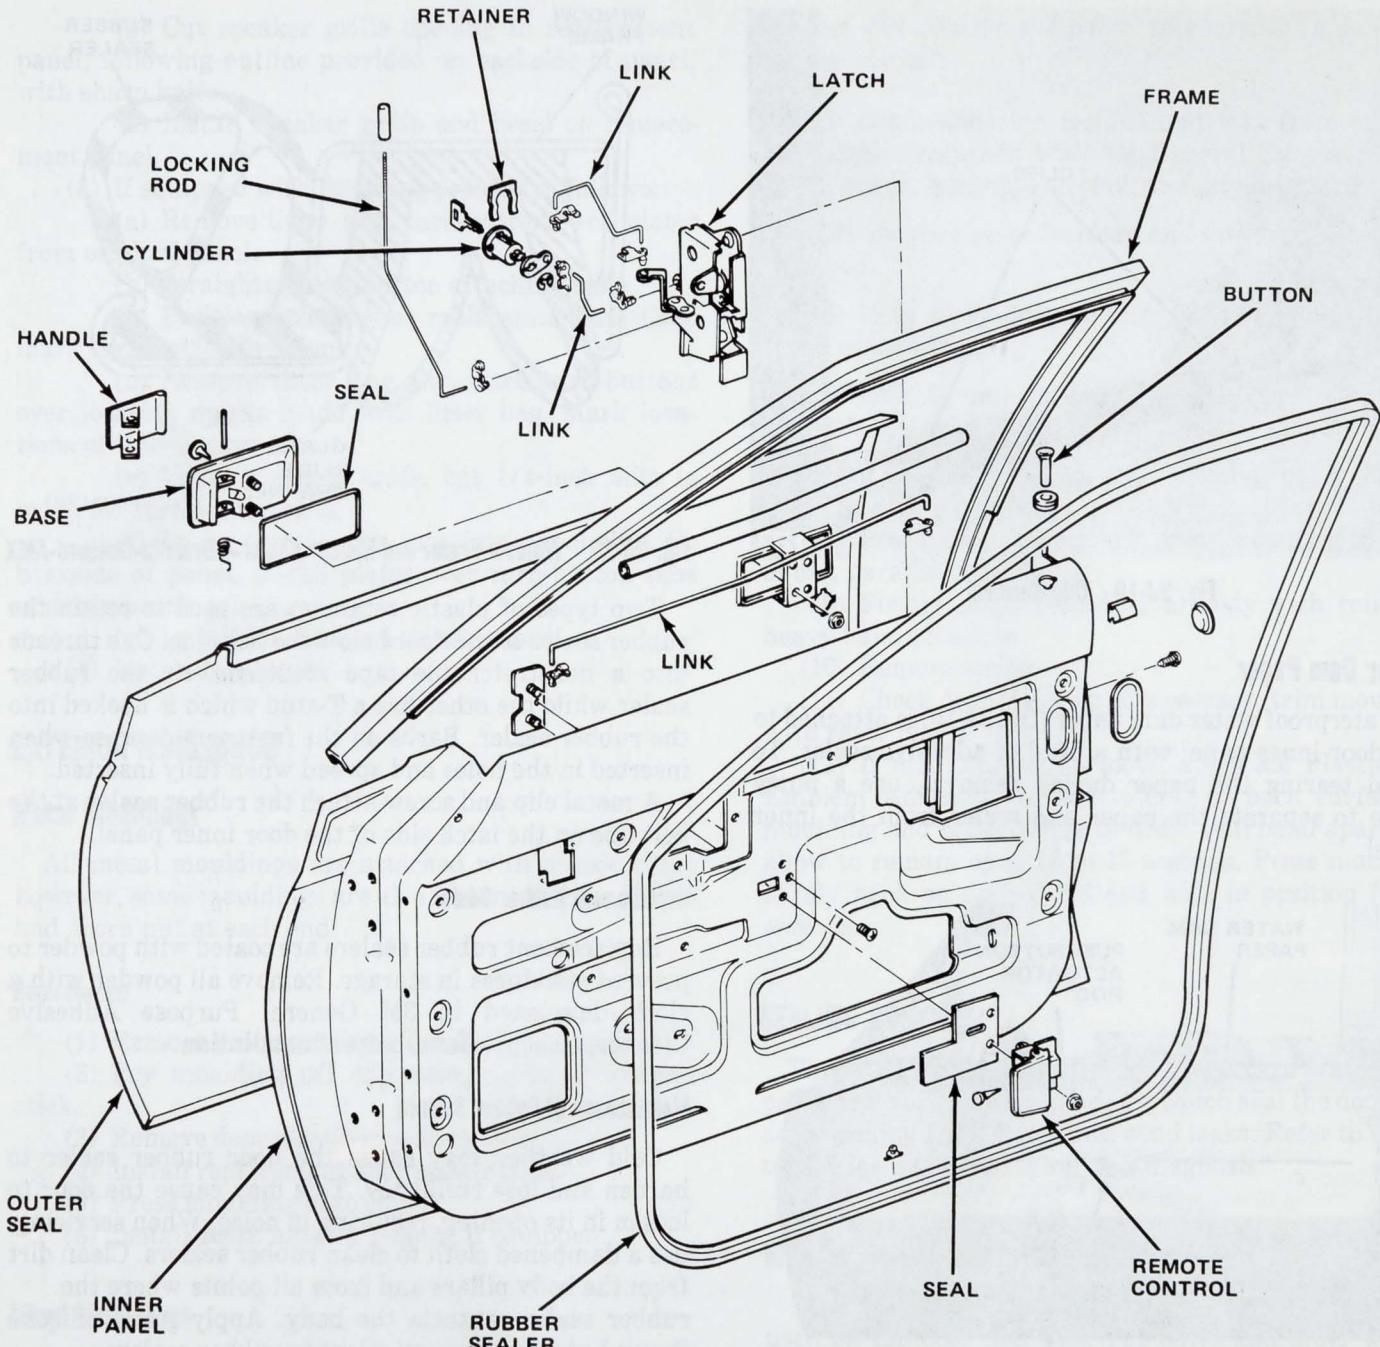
J-21 Door Components—Gremlin-Concord-AMX
